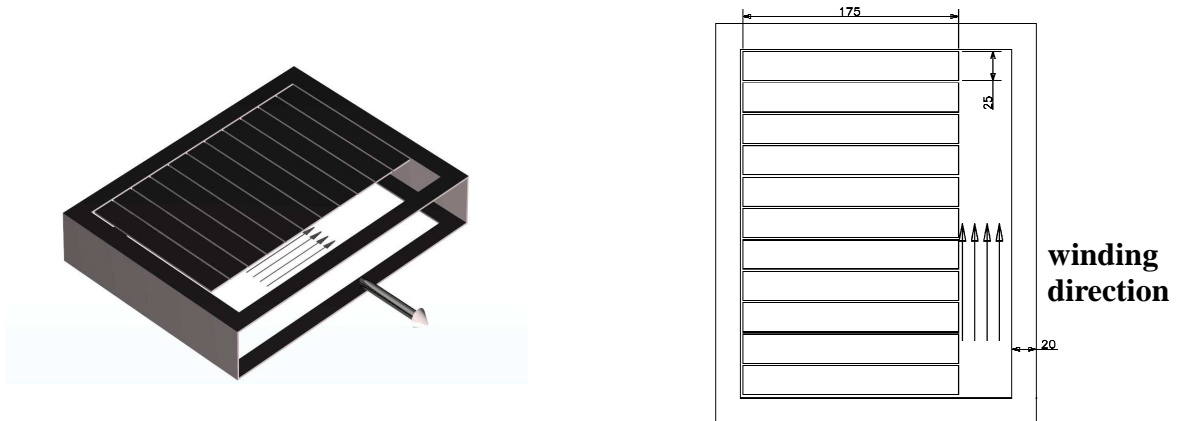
A basalt fiber panel manufactured by a filament winding technique.
